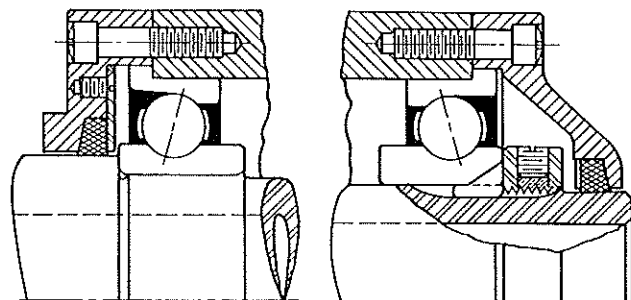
Ball bearing mountings. Courtesy New Departure Division of General Motors.
